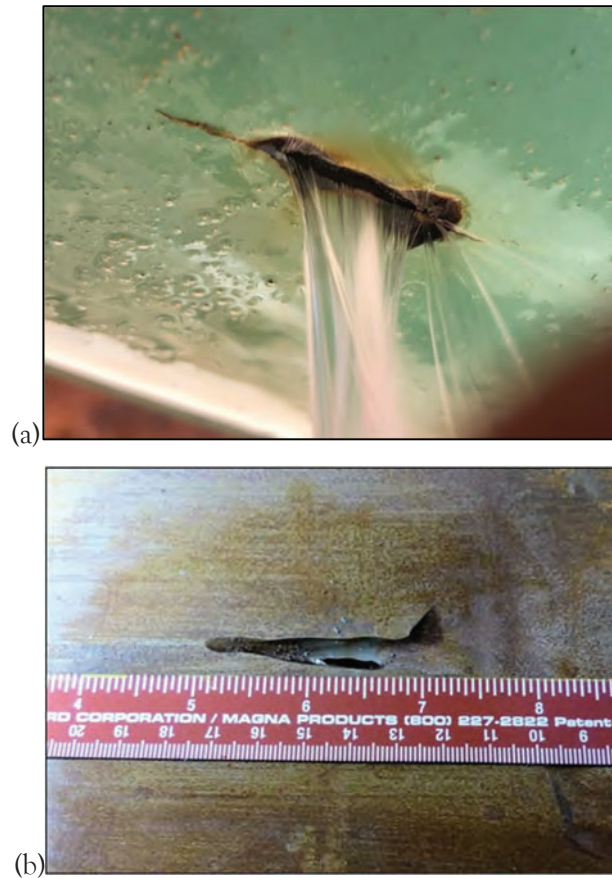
Case 1 - Seam failure of 2012 installed pipe during hydrostatic test
